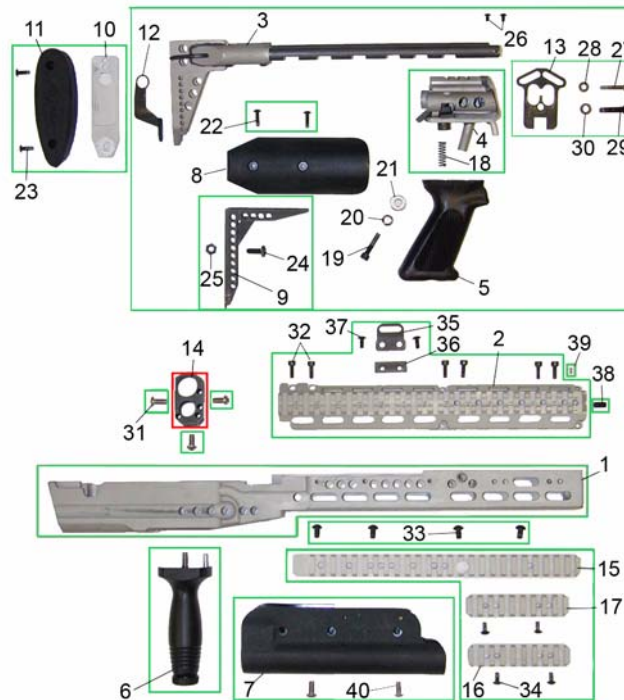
MK 14 MOD 0 Stock Chassis Assembly.
